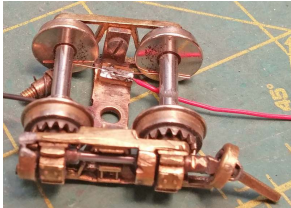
De-soldering braid and my soldering iron were employed to wick off excess solder that remained on the truck frames.
